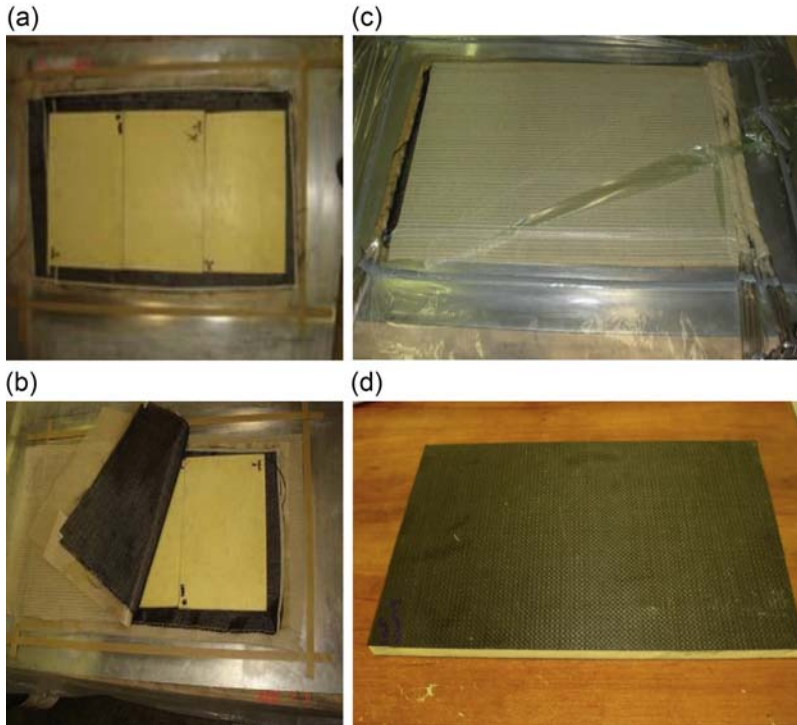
Fabrication of sandwich composites with nanophased core: (a) layup of core over the bottom face sheet fabrics; (b) placement of top face sheet fabric over the core; (c) vacuum bagging and resin infusion, and (d) finished sandwich panel.
